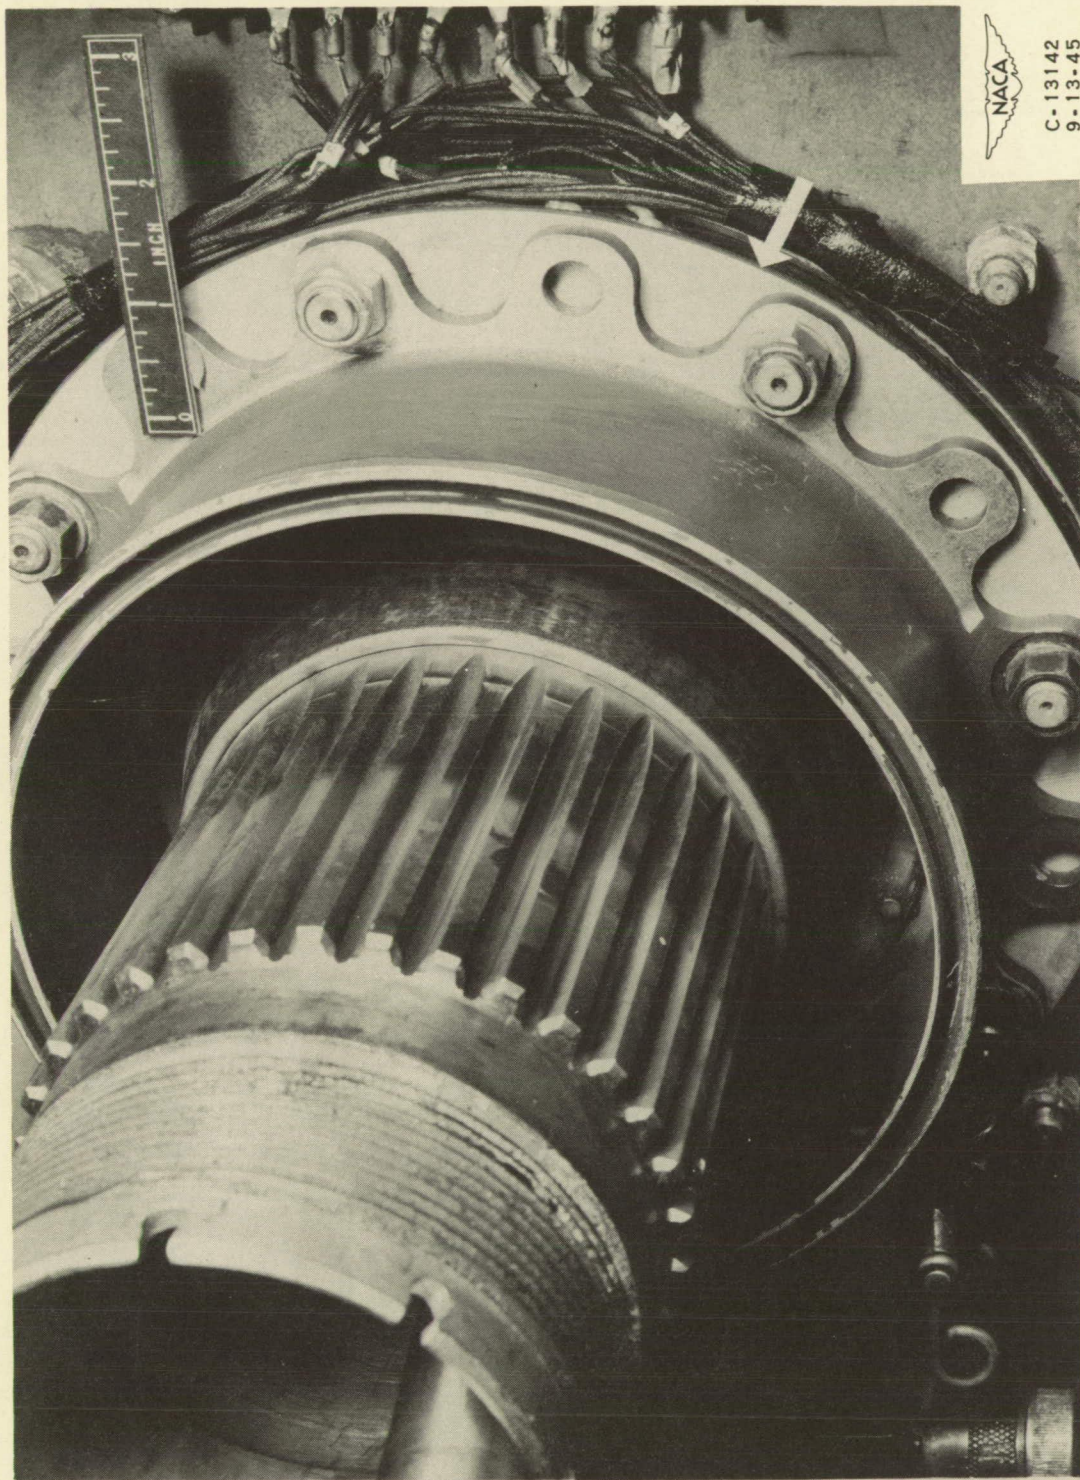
Close-up view of airplane nose showing NACA electric thrust meter installed on reduction-gear case. Propeller removed.
